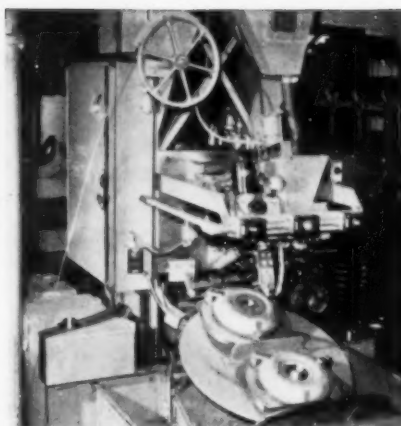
Weld-assemblies drawn cups to front plates for torque converters. Work is mounted on fixture of indexing table while previous assembly is welded. Open end of cup has a turned step for press fit to joining component. Mating walls are at right angles and are fillet welded to pressure tight joint. Production is automatic... 80 pieces per hour with potential increase to 120 pieces per hour.
